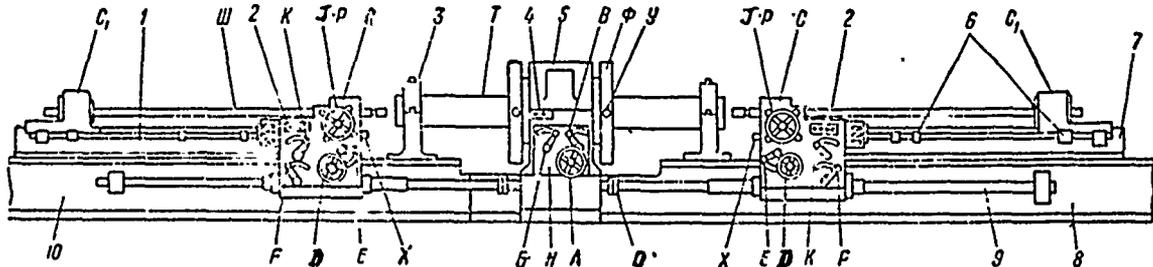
Horizontal two-sided drilling and boring machine -- 2
